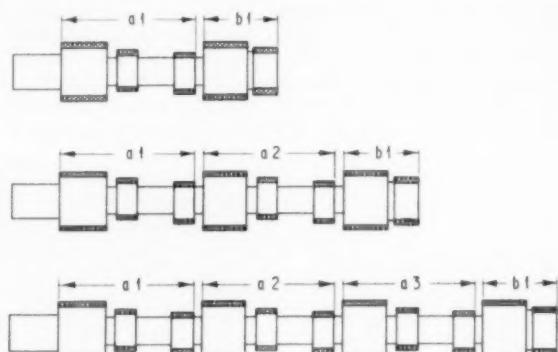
Camshafts with standardized grouping of cams and journals. Only two different burner assemblies are thus required
